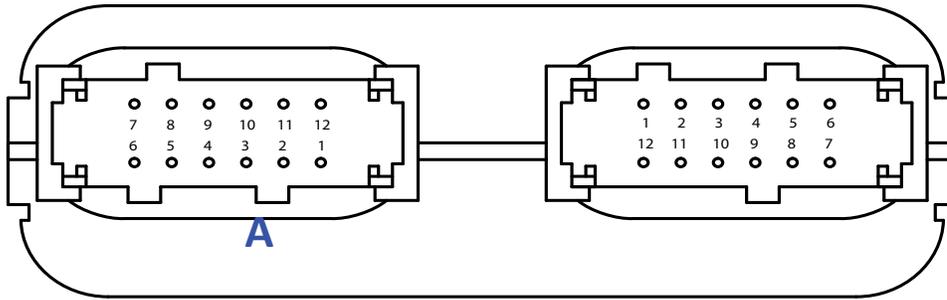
HEC-P2xxx A / B Connector Front View
